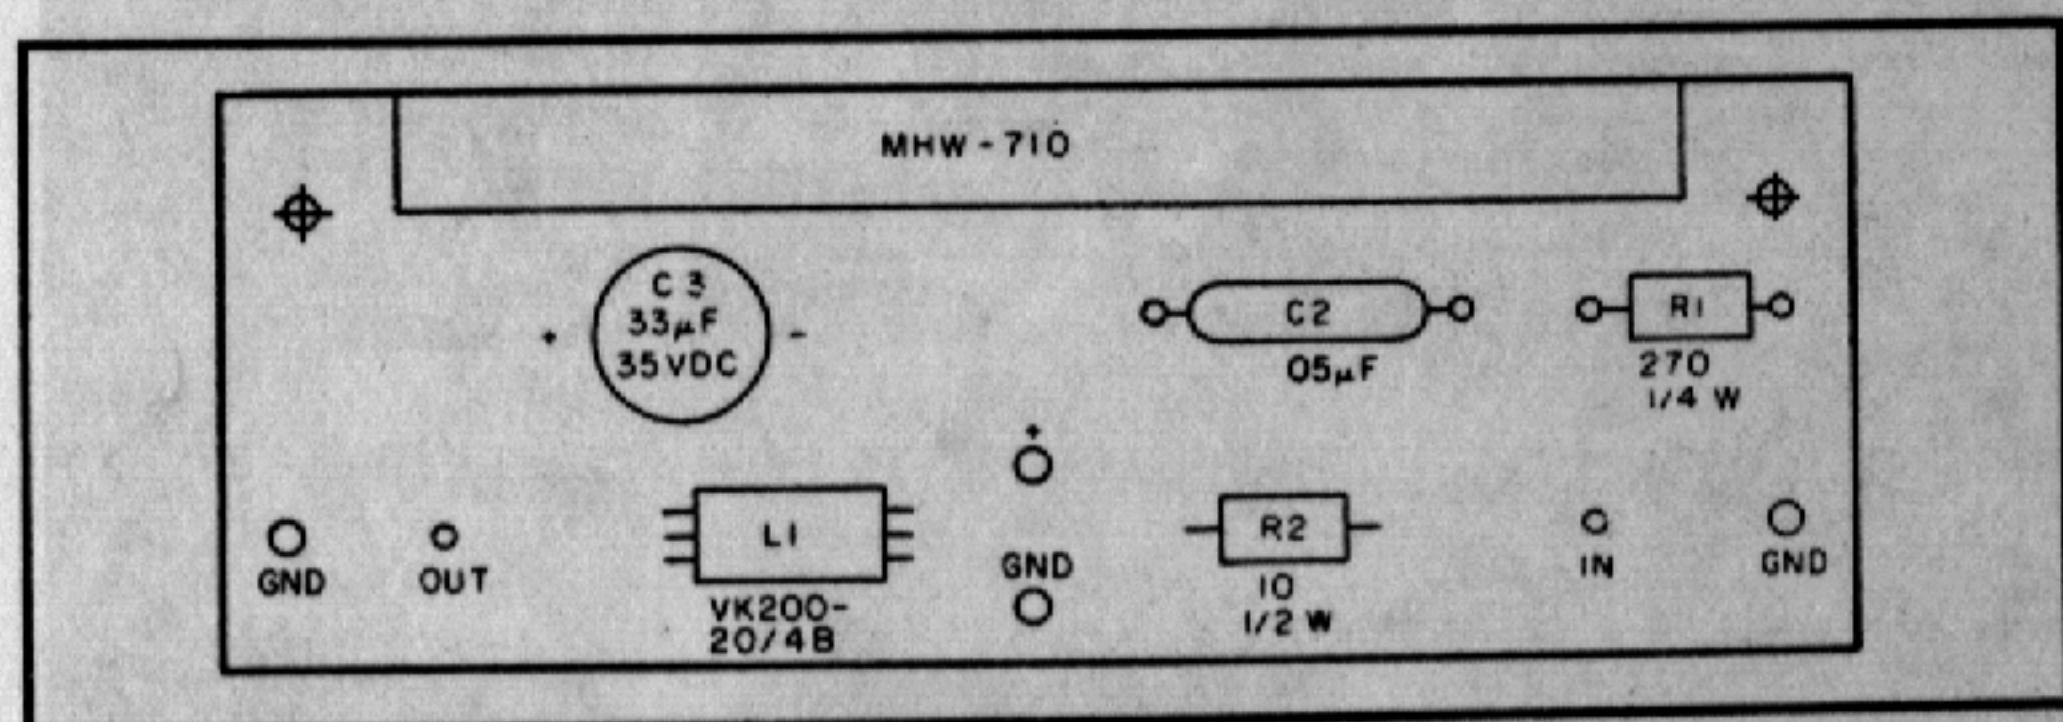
10 watt ATV amplifier PC board, component side.
